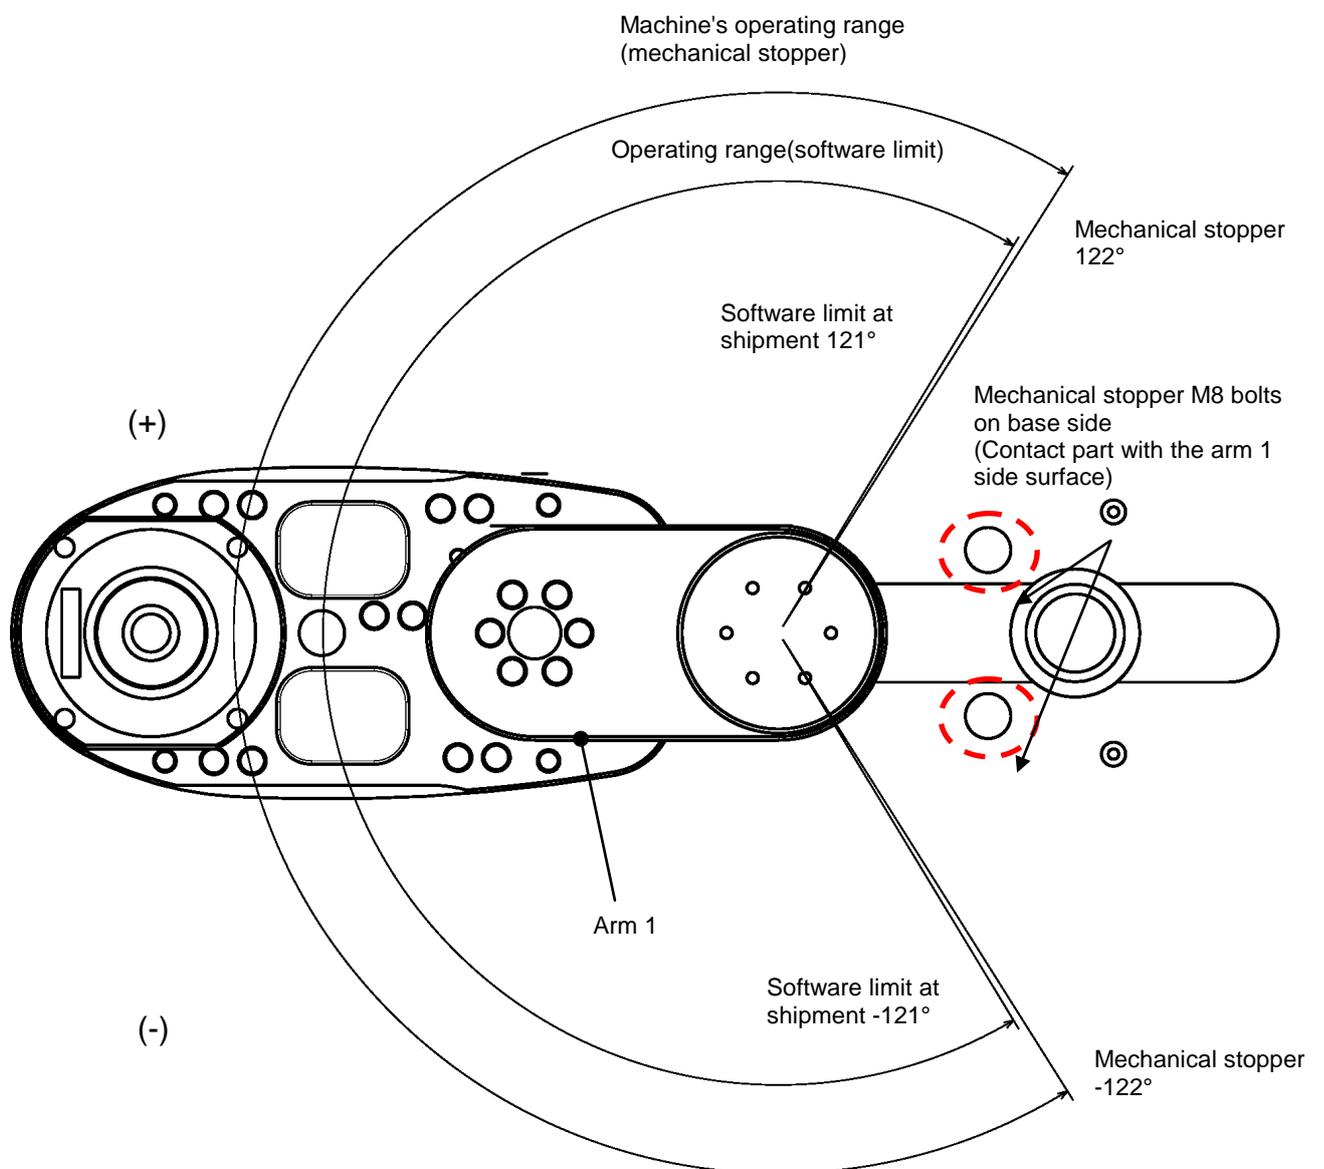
Axis 1 mechanical end settings (TH180)
